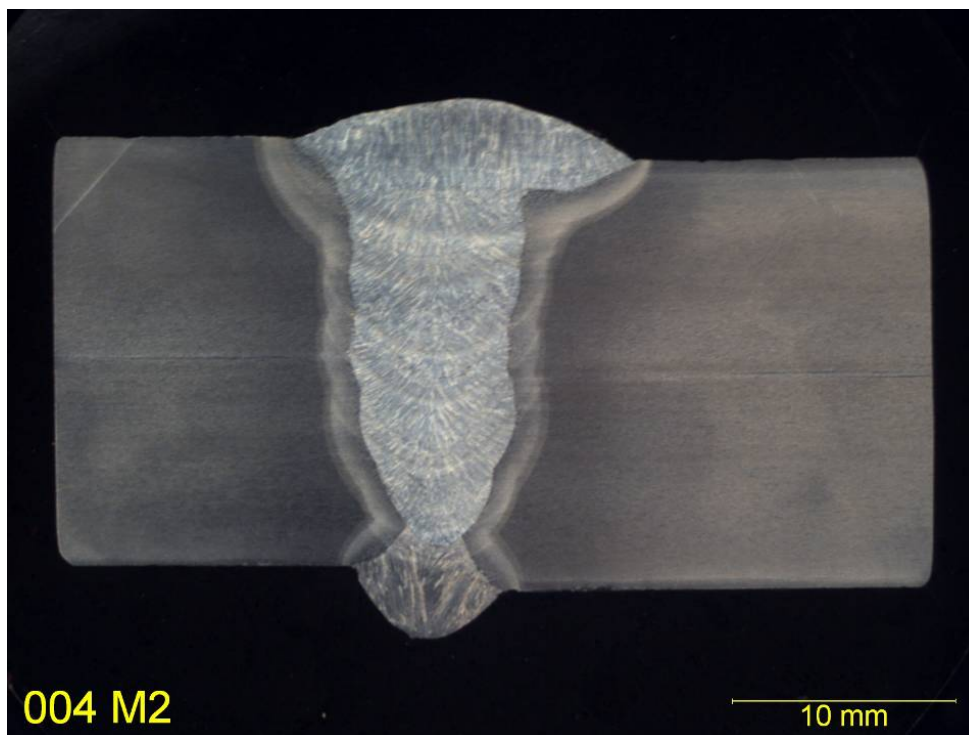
Photo-macrograph Showing Cross-section of Weld A4
